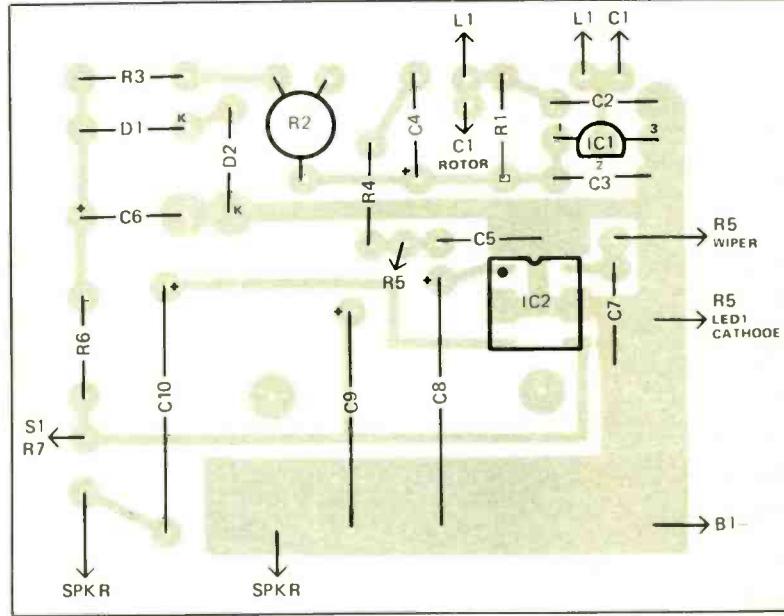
Wire the pc board exactly as shown here, being careful to properly polarize and orient components before soldering their leads to the foil.
